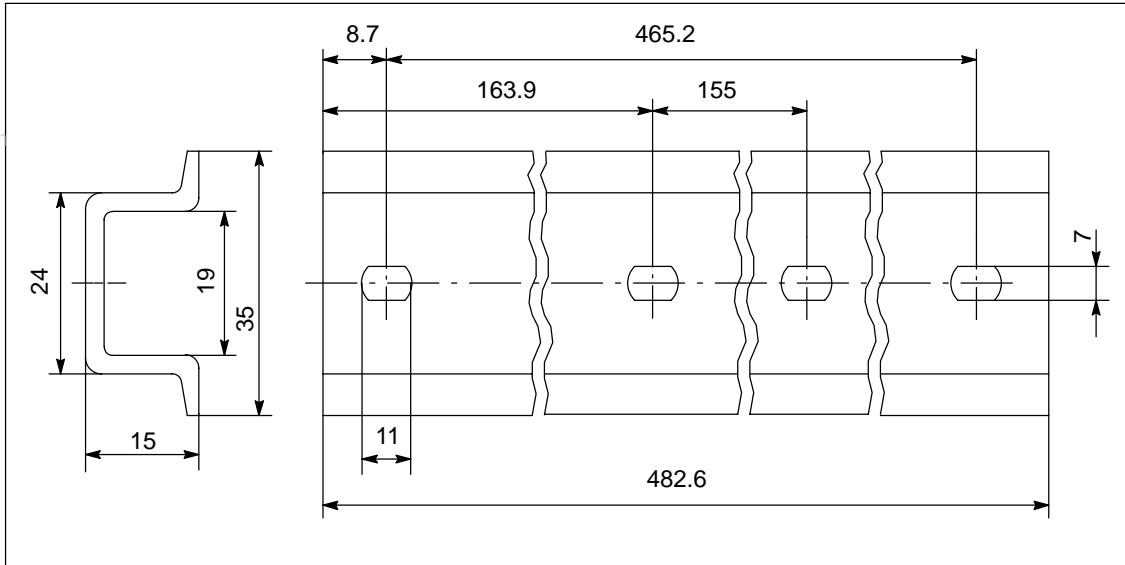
Dimension Drawing of the 483 mm Standard Rail
